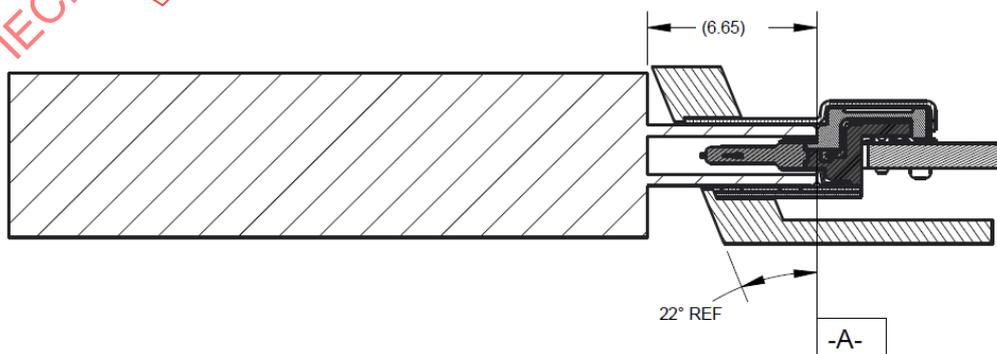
Cable Plug Overmold and an Angled Surface
